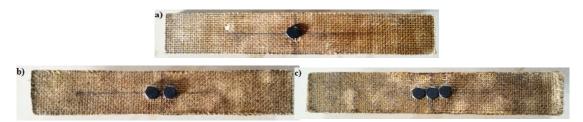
Number of holes in the damaged specimen along horizontal axis is filled with M6 bolt and nut; (a) 1 bolt, (b) 2 bolts and (c) 3 bolts
